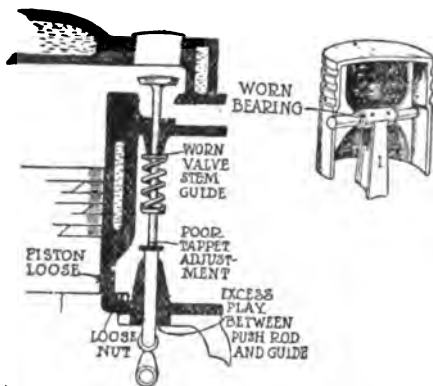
To test for a knock; place finger on edge of bearing and connecting rod—have some one slightly rock engine, with switch off—the looseness, if any, will be felt. This plan can be used on Ford main bearings, but not on upper end of connecting rod, as it cannot be reached, but on some of the other engines it can.
